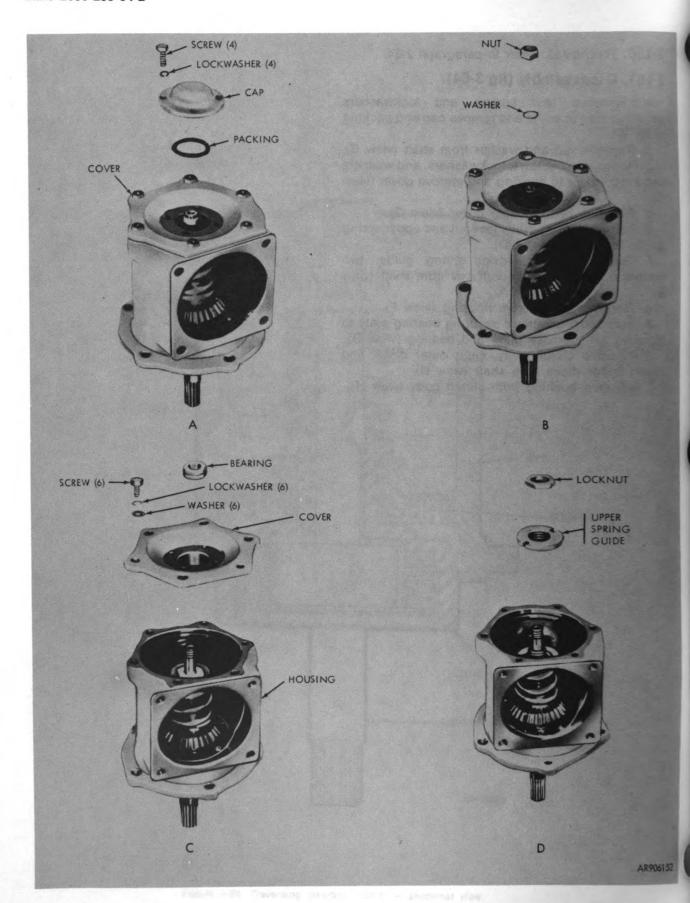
Traversing gearbox clutch disassembly and assembly (1 of 2).
